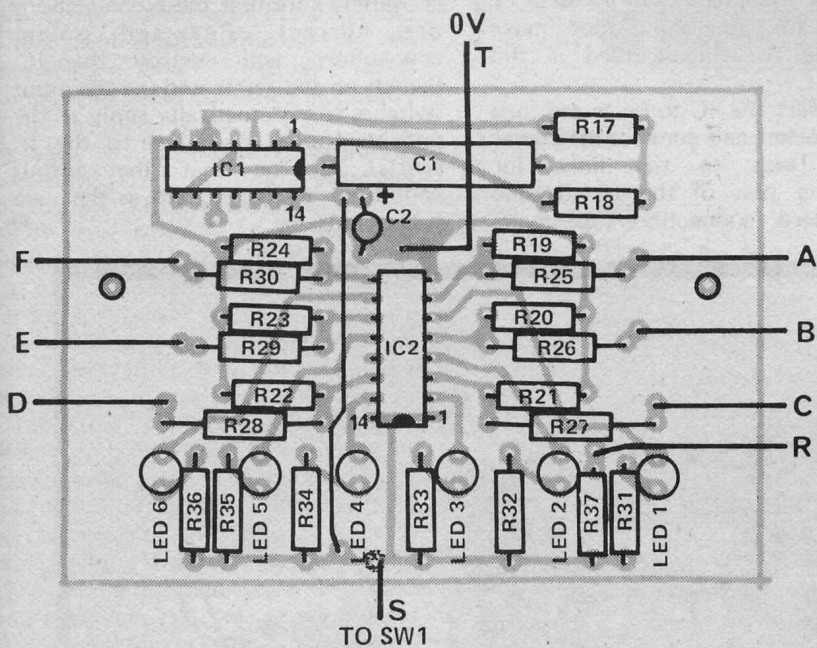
Component overlay for board ETI-123a. Note that C1 may need to be mounted on reverse side, and that the LEDs should be mounted as detailed in the text.
